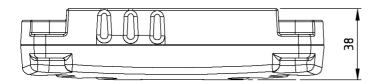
Mechanical Dimensions of UDL120 without steel sides
